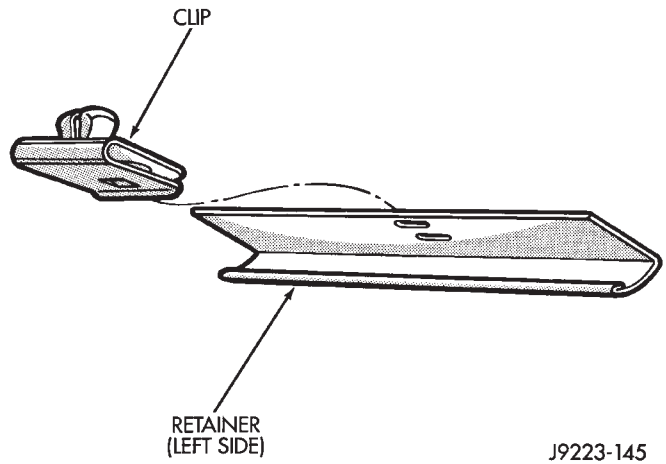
Upper Trim Moulding—4-Door XJ Vehicles
